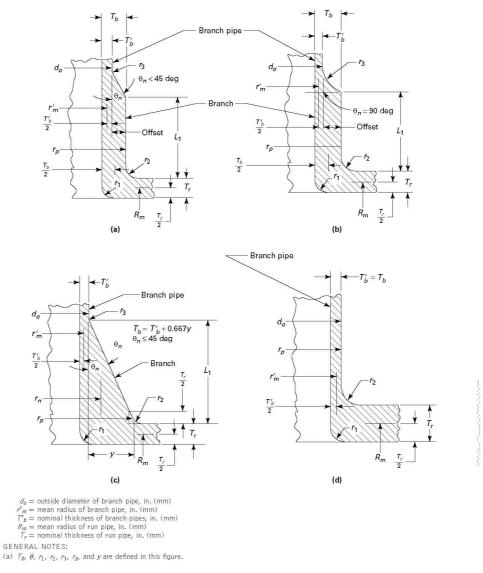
(b)-2 BRANCH CONNECTION NOMENCLATURE
